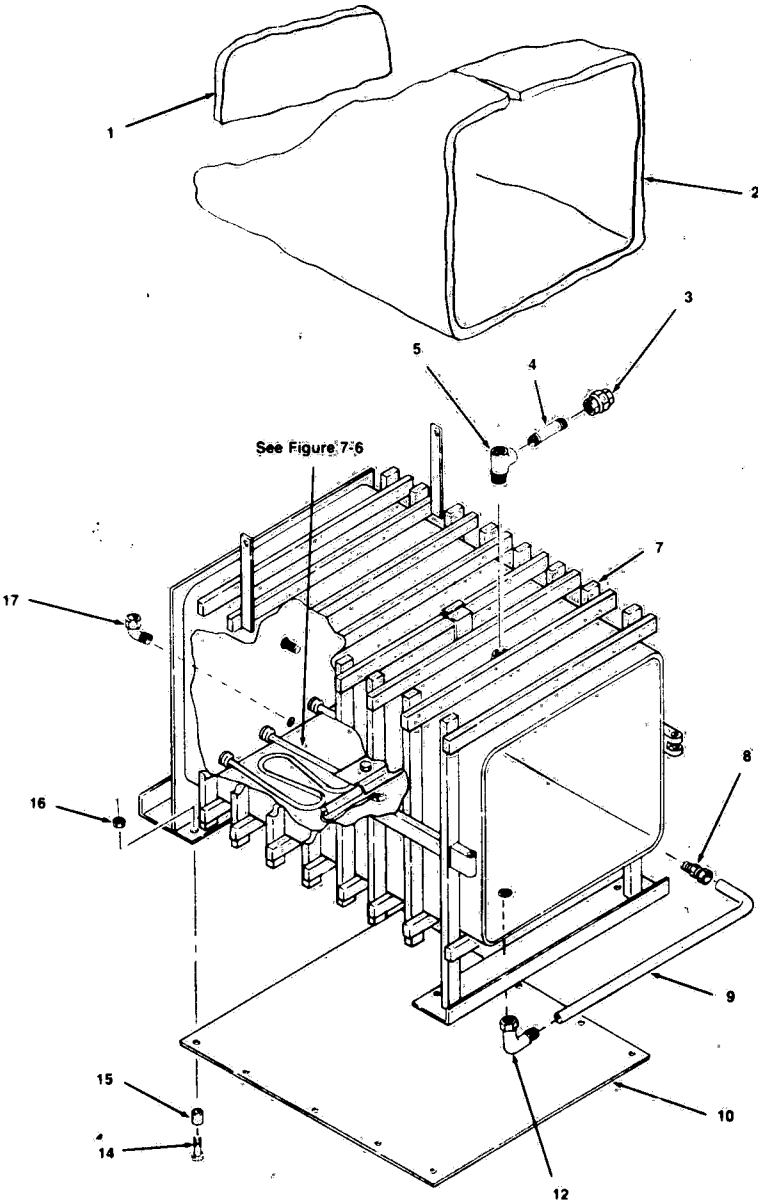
GENERAL ASSEMBLY — PART 4 OF 4.
